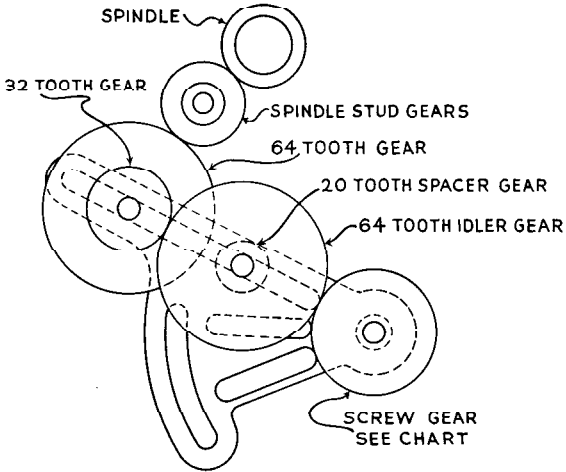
Gear set-up for 18 through 32 threads per inch.
